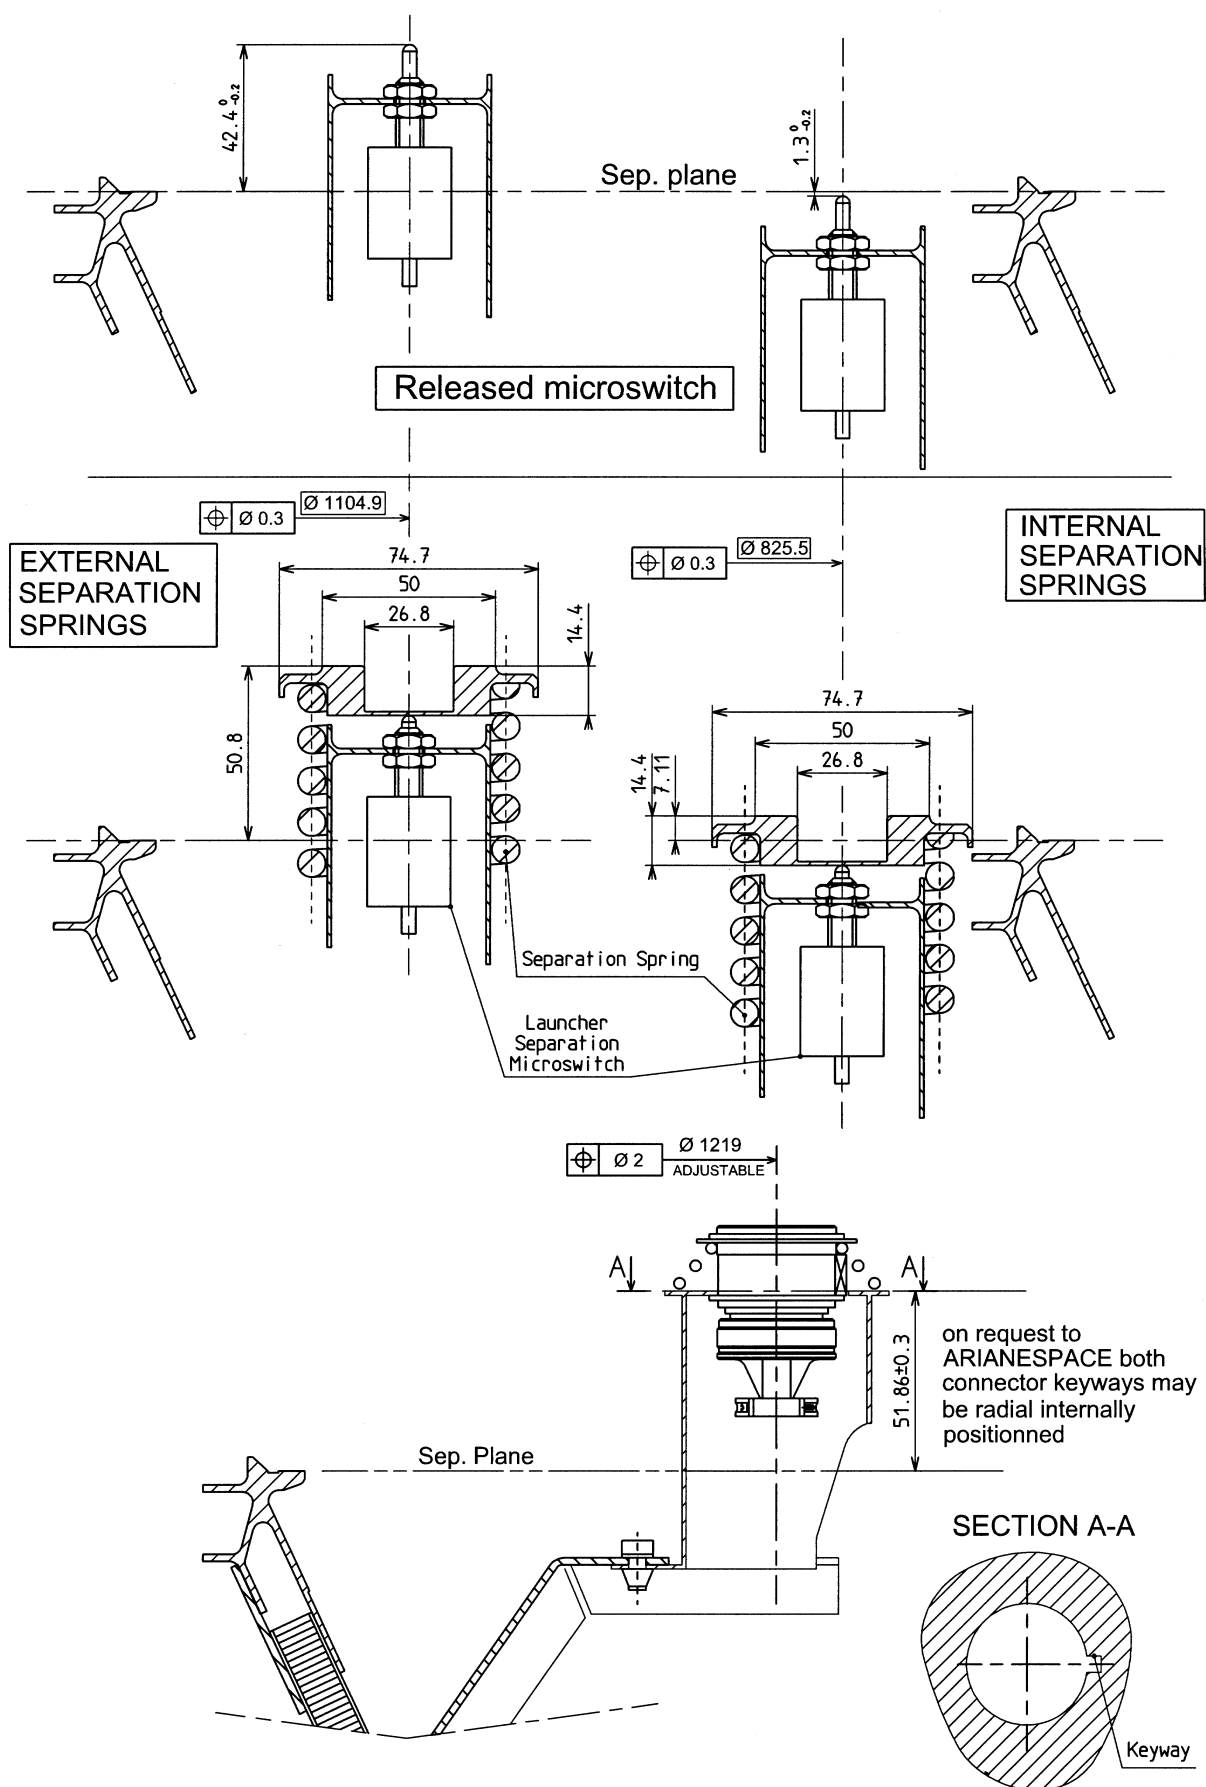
SYLDA mechanical interfaces (details)
